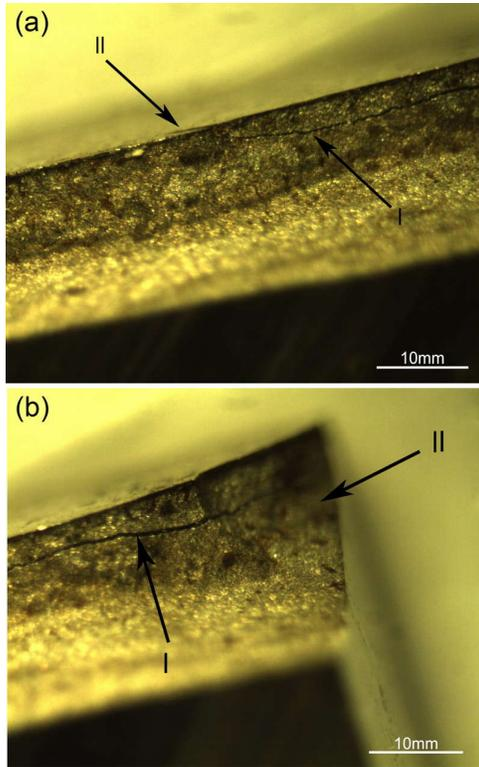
Area of the subsurface crack that caused material detachment (examined with stereoscope)
